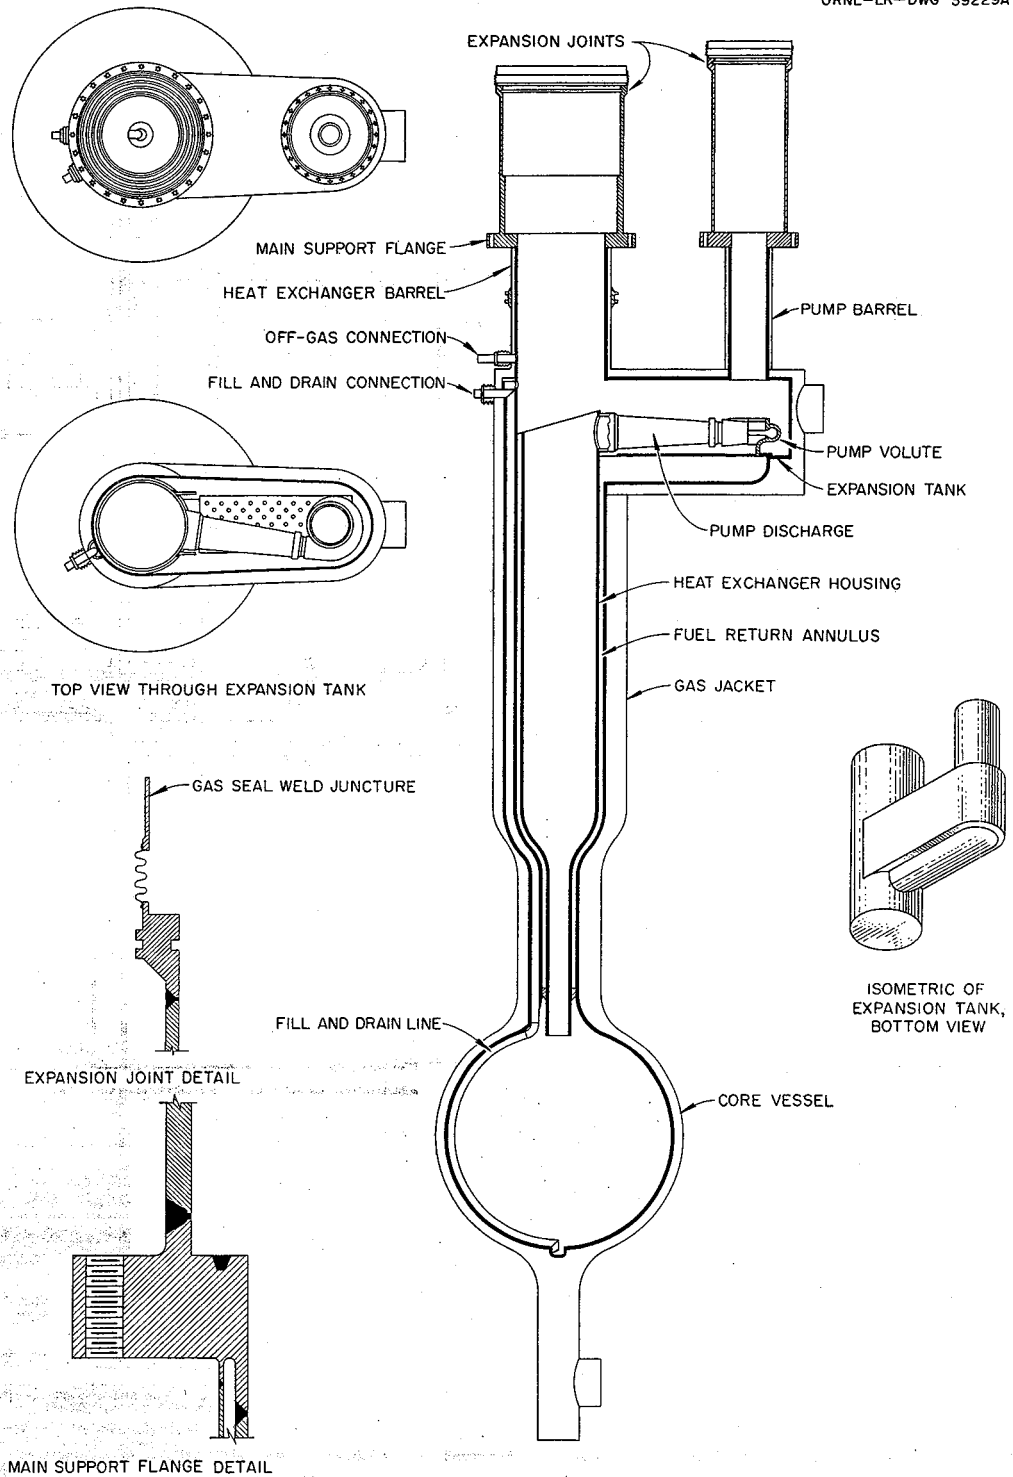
Fuel Container Weldment and Gas Jacket.
